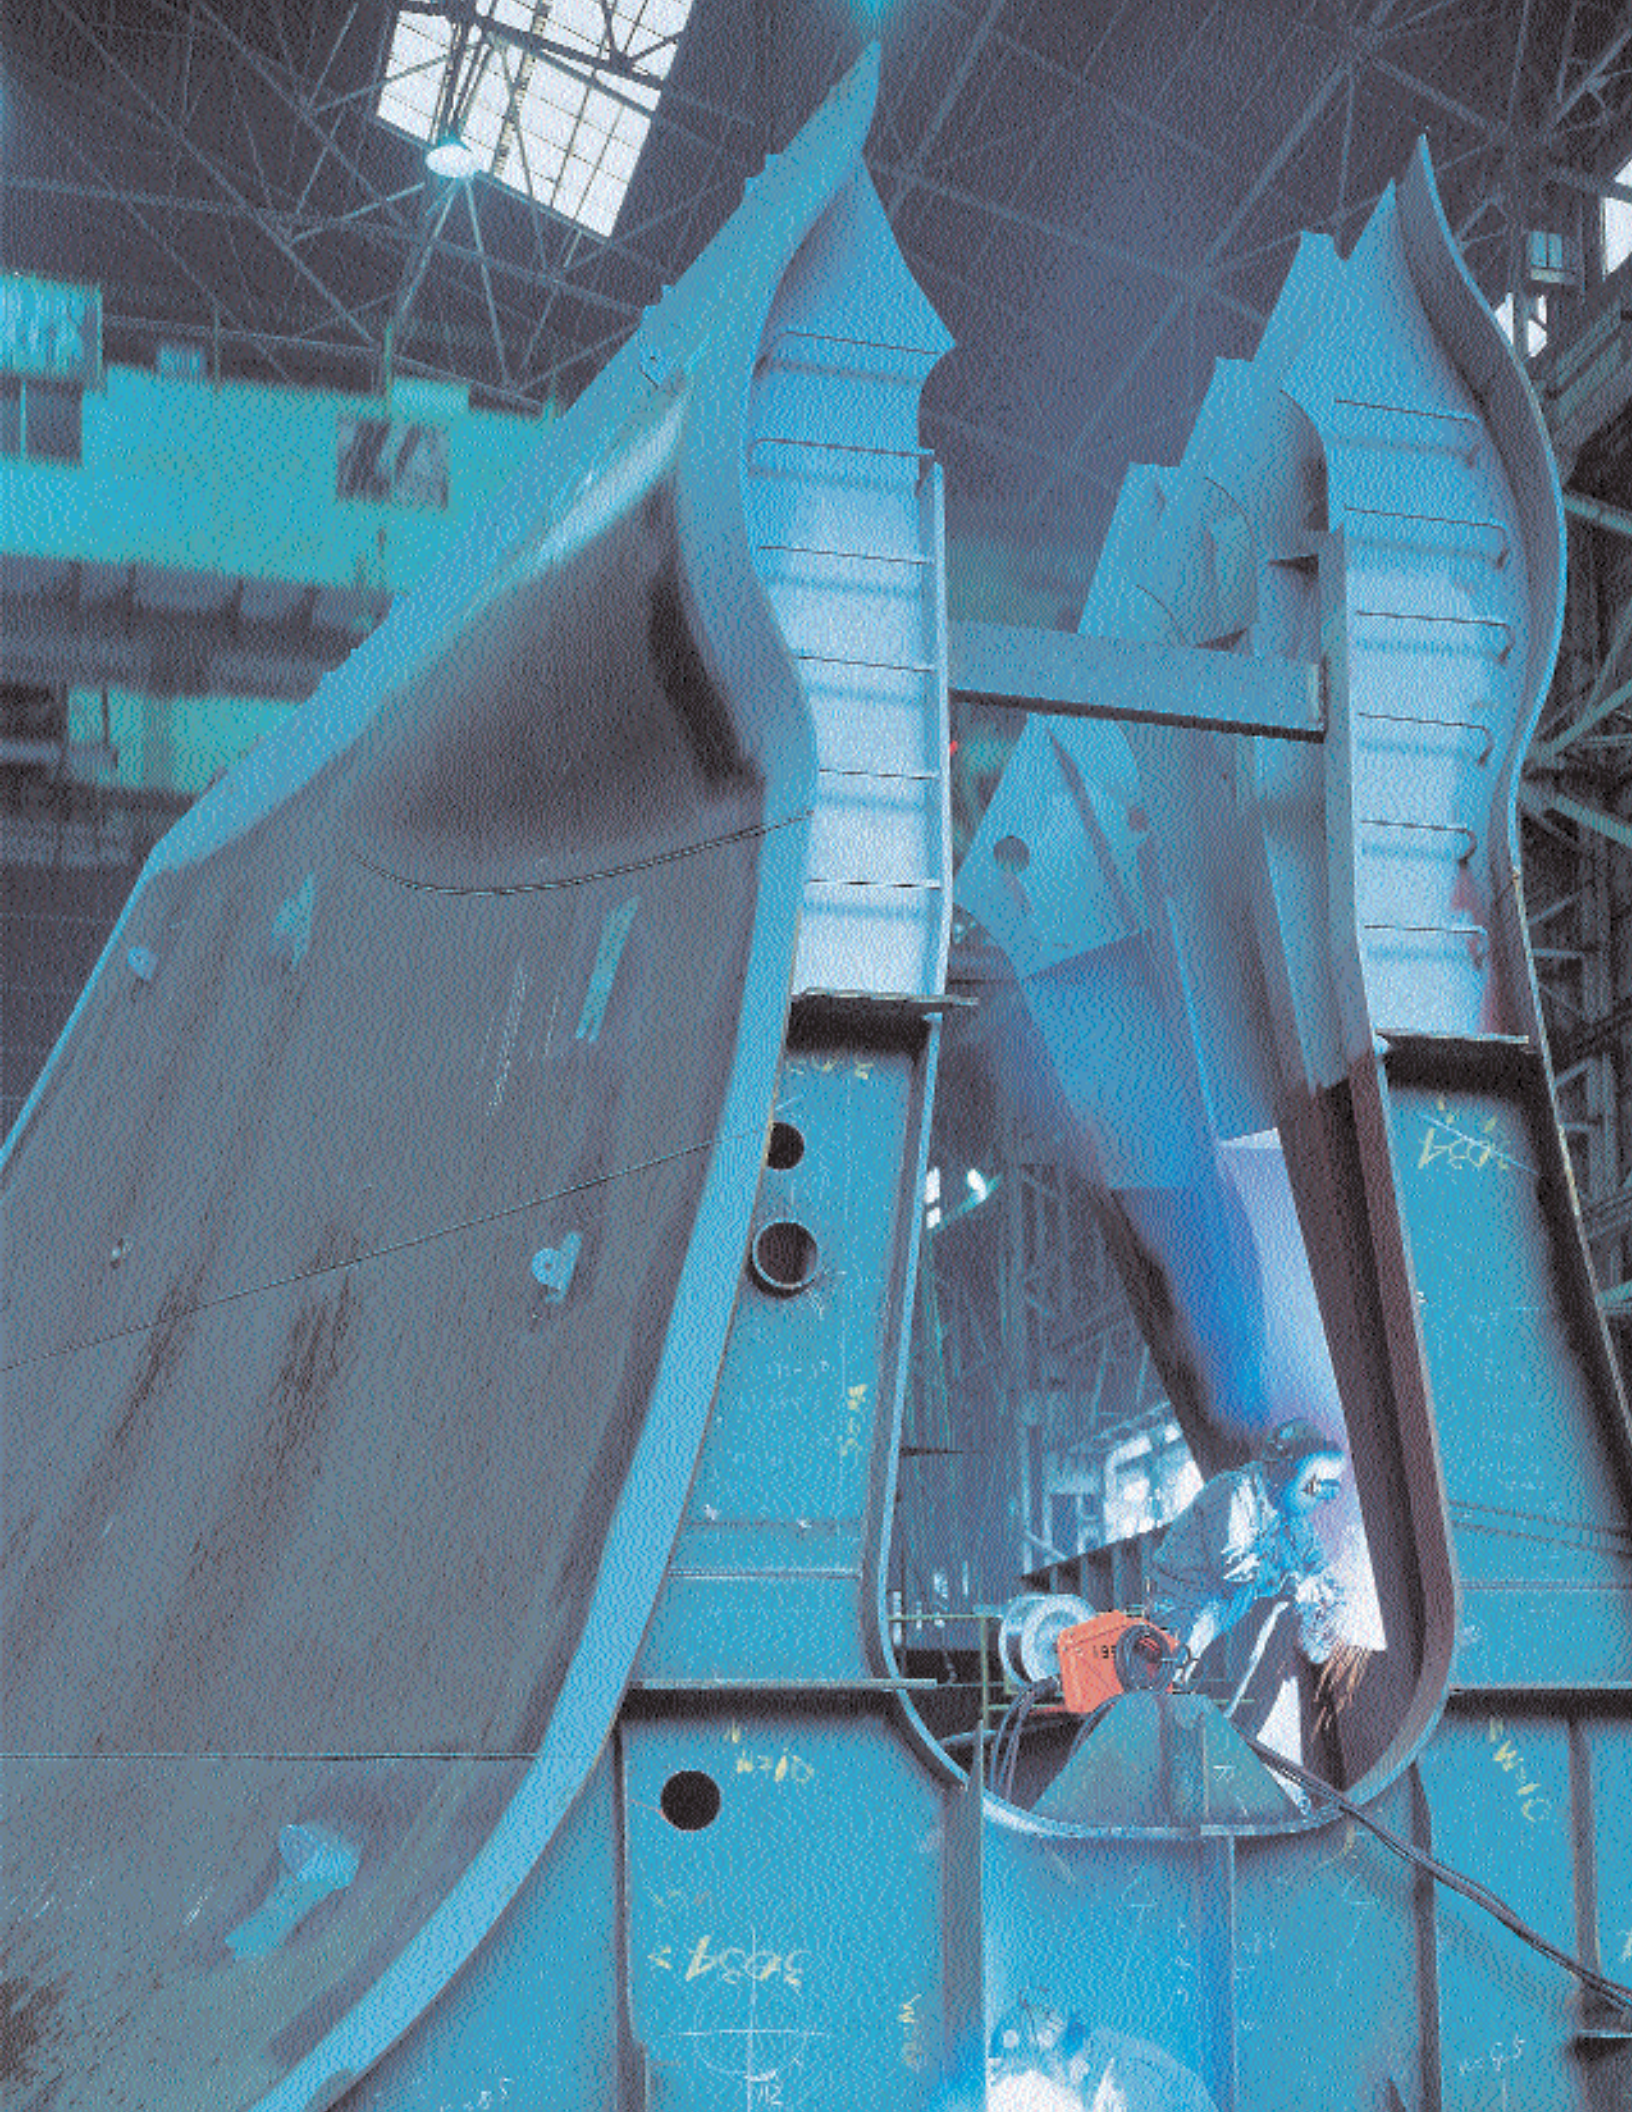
Multi pass welding of a leg length of 12 mm or more
